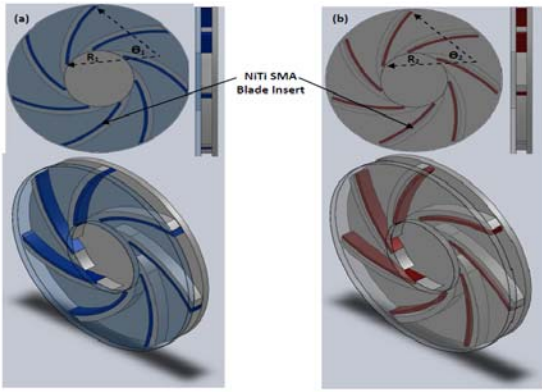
Operating mechanism of the Shape Memory Smart Impeller
